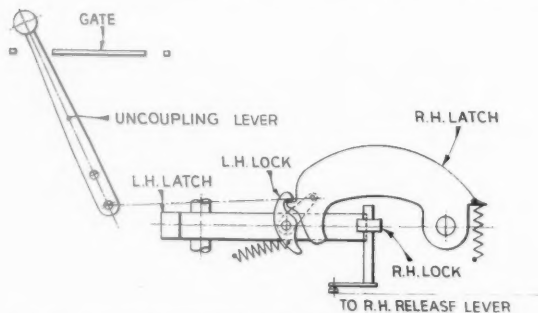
Coupled position. Right-hand latch locked in engaged position by semi-rotary lock
